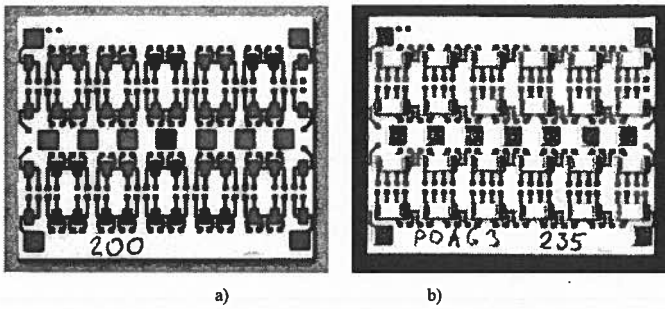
Test pattern (a) and test 1206 components soldered to the solder pads (b)
